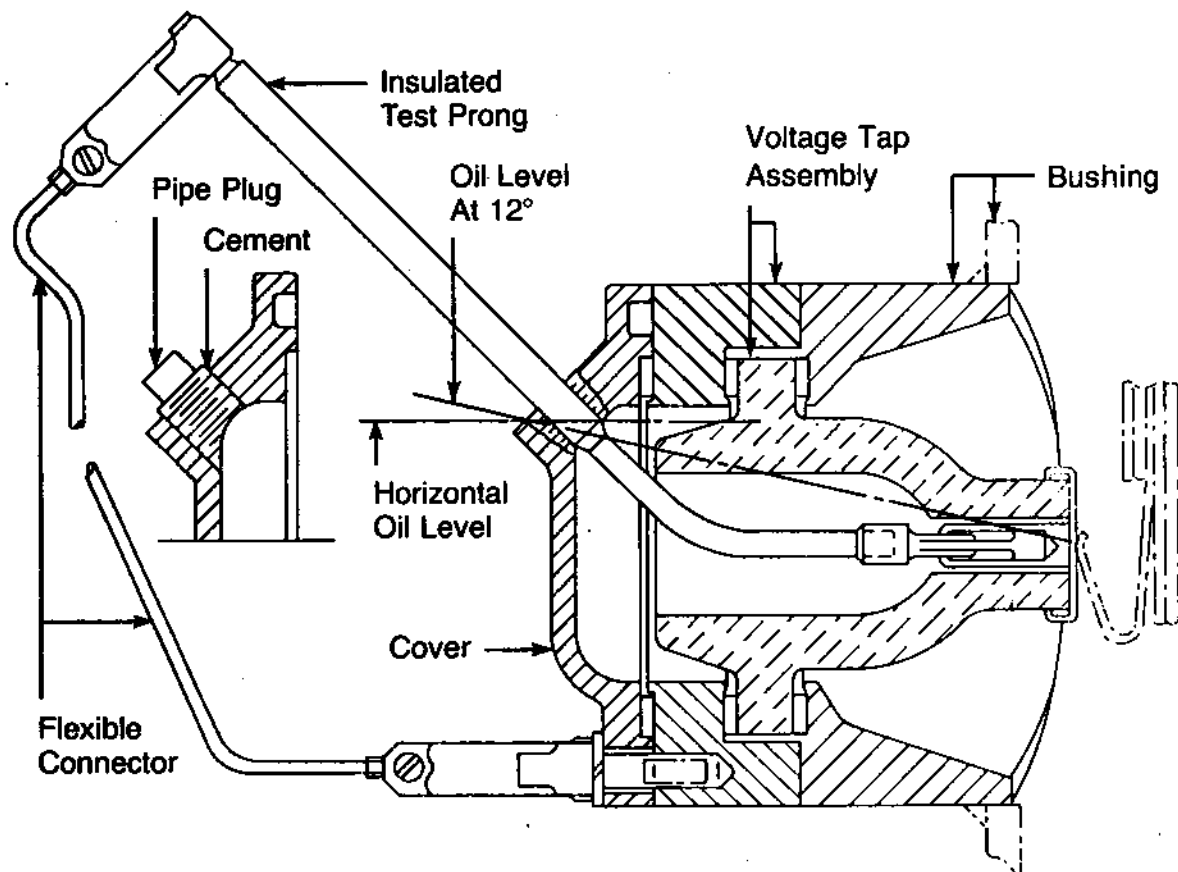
Test Prong for Making Ungrounded Power Factor Tests Through the Voltage Tap on Bushings Above 69 kV with a Type B Tap
